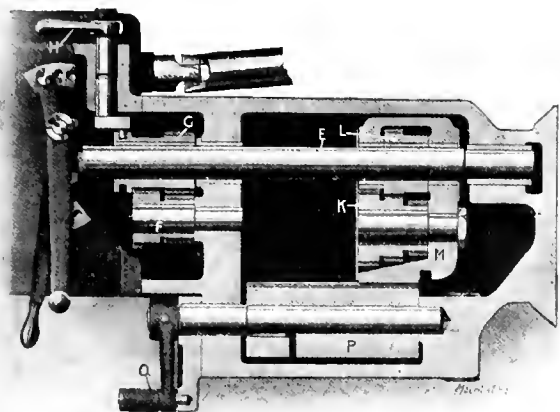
Design of Tumbler Gearing for Spindle Drive
